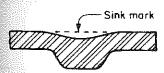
Typical sink mark opposite a heavy section.
